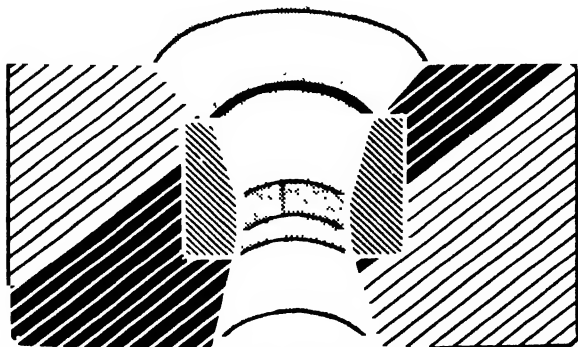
8. Schematic cross-section (not to scale) of a single-hole wire-drawing die employing a nib of sintered carbide mounted in a circular steel holder.
